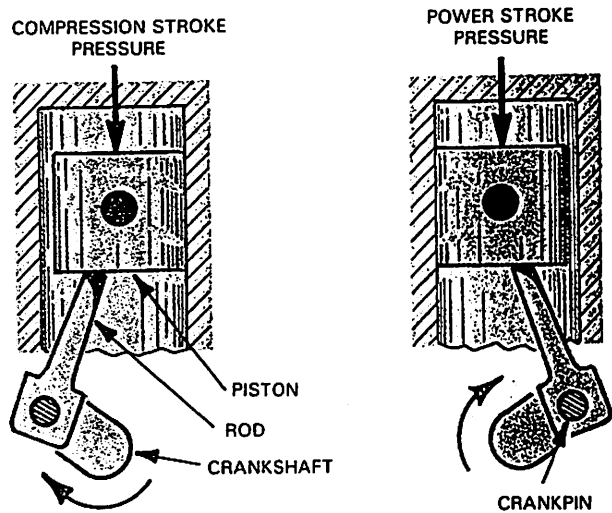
Exaggerated view shows how a loose piston is pushed from one side of cylinder to other. Sides that rub cylinder wall are called thrust surfaces.
